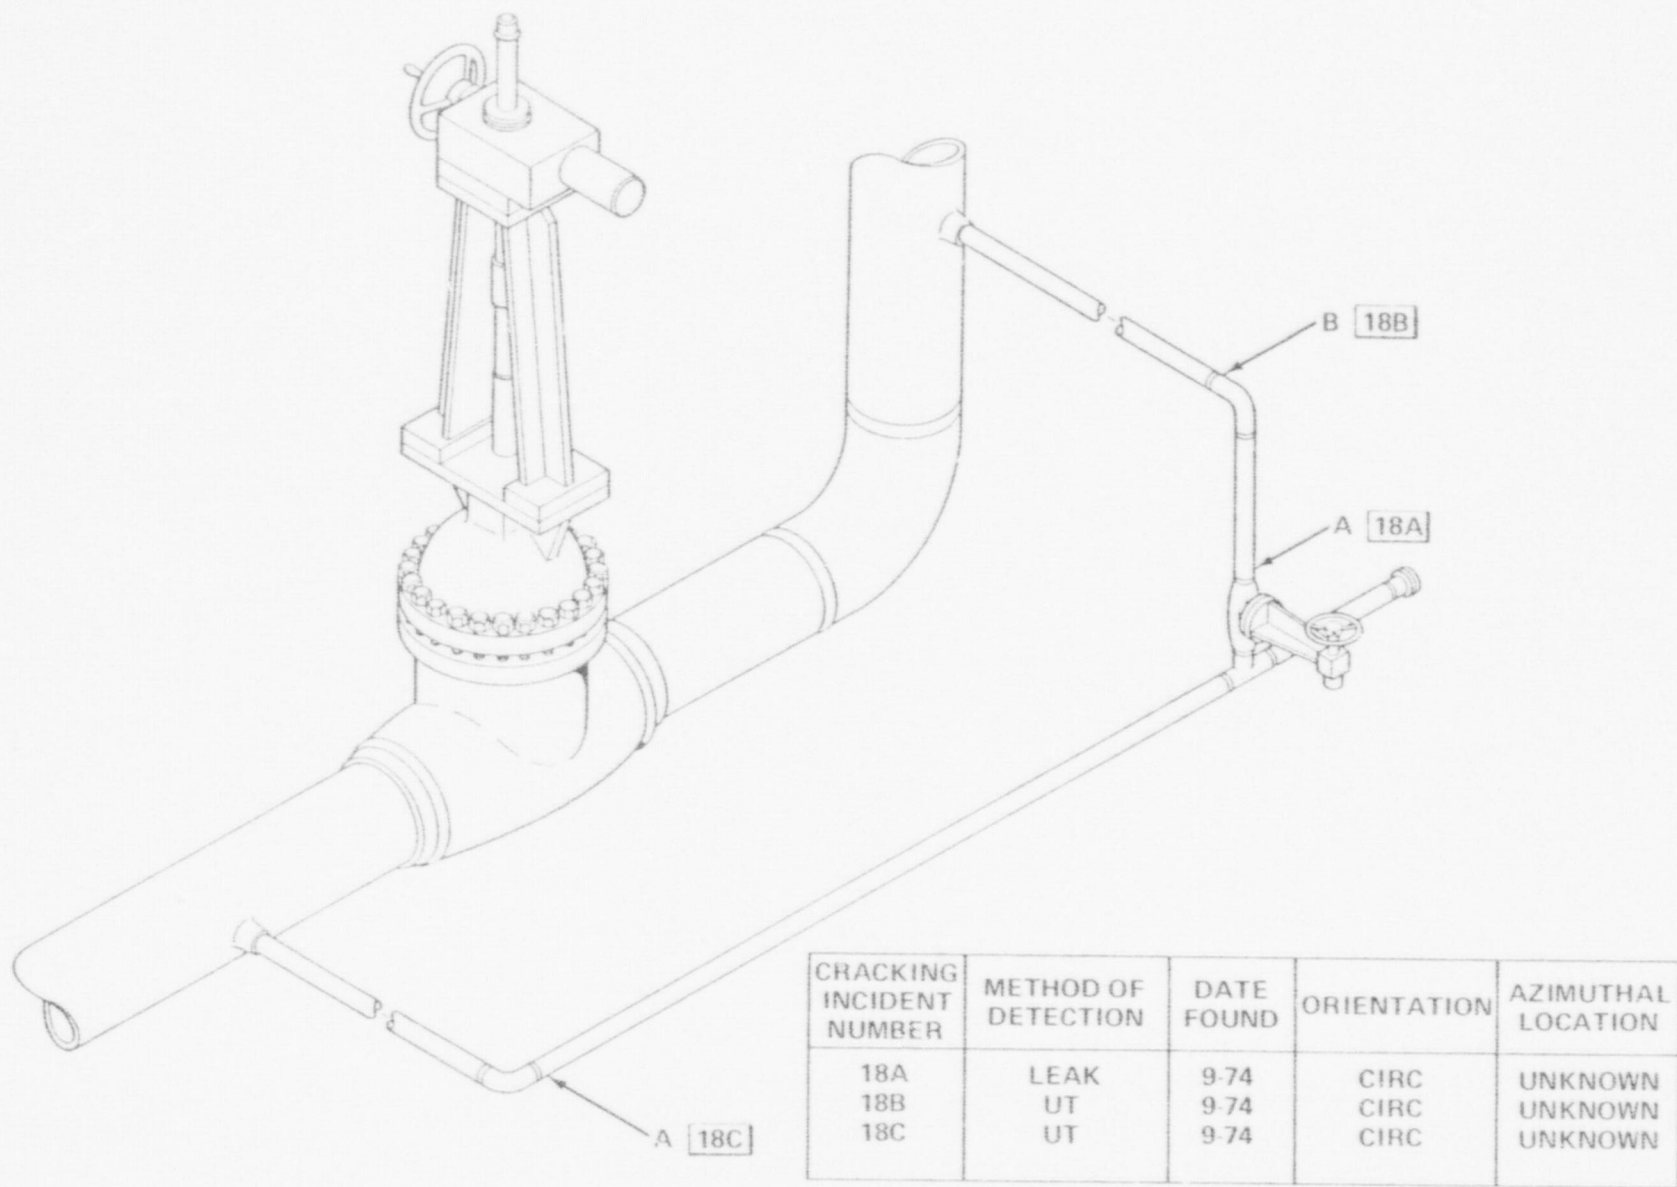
Crack Locations – Millstone Pt 1 Recirculation Bypass Lines – Loops A and B
